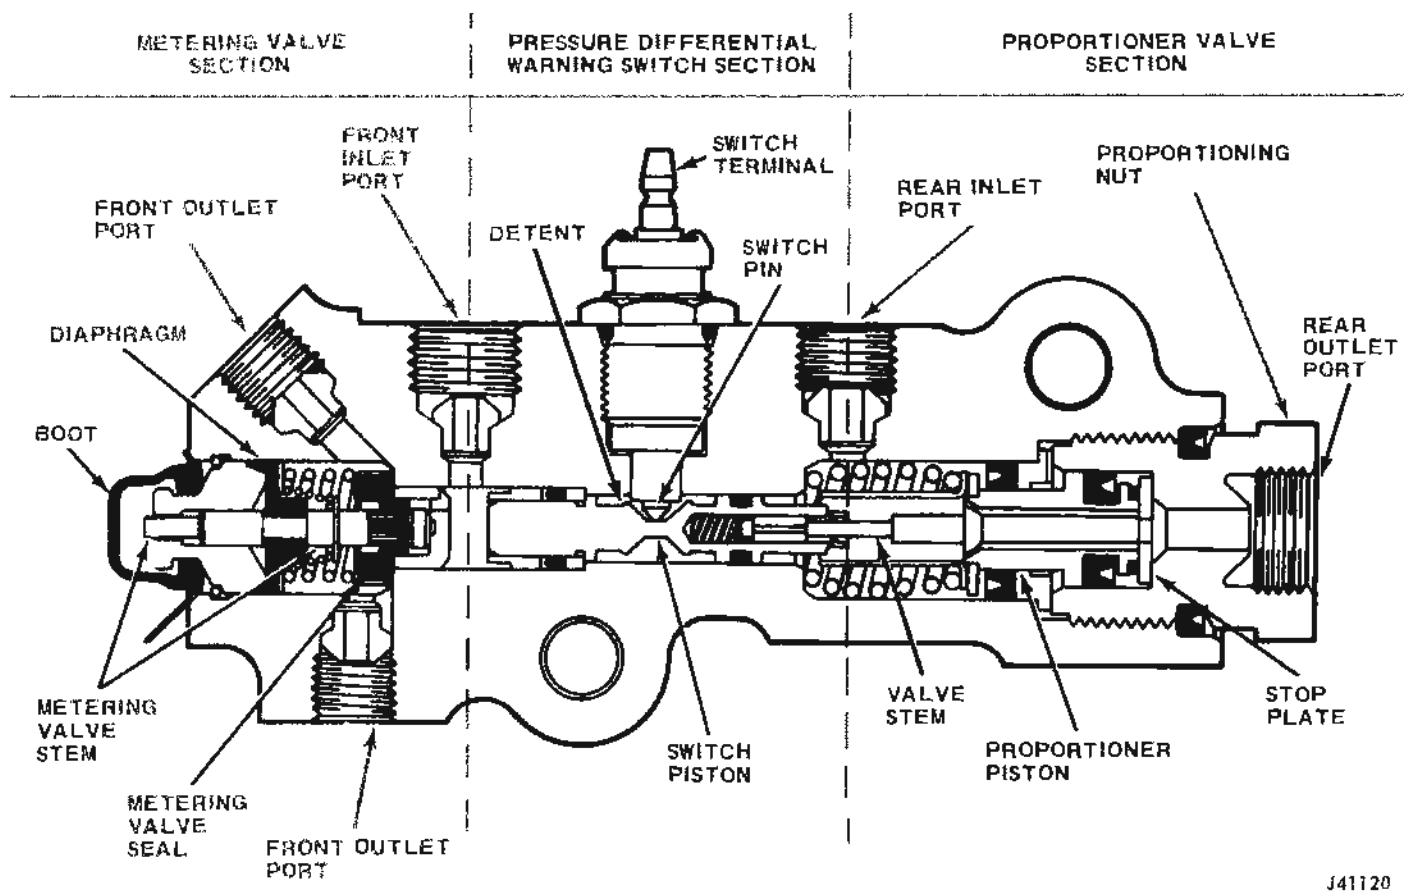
Combination Valve Cross Section - Cherokee, Wagoneer, Truck
